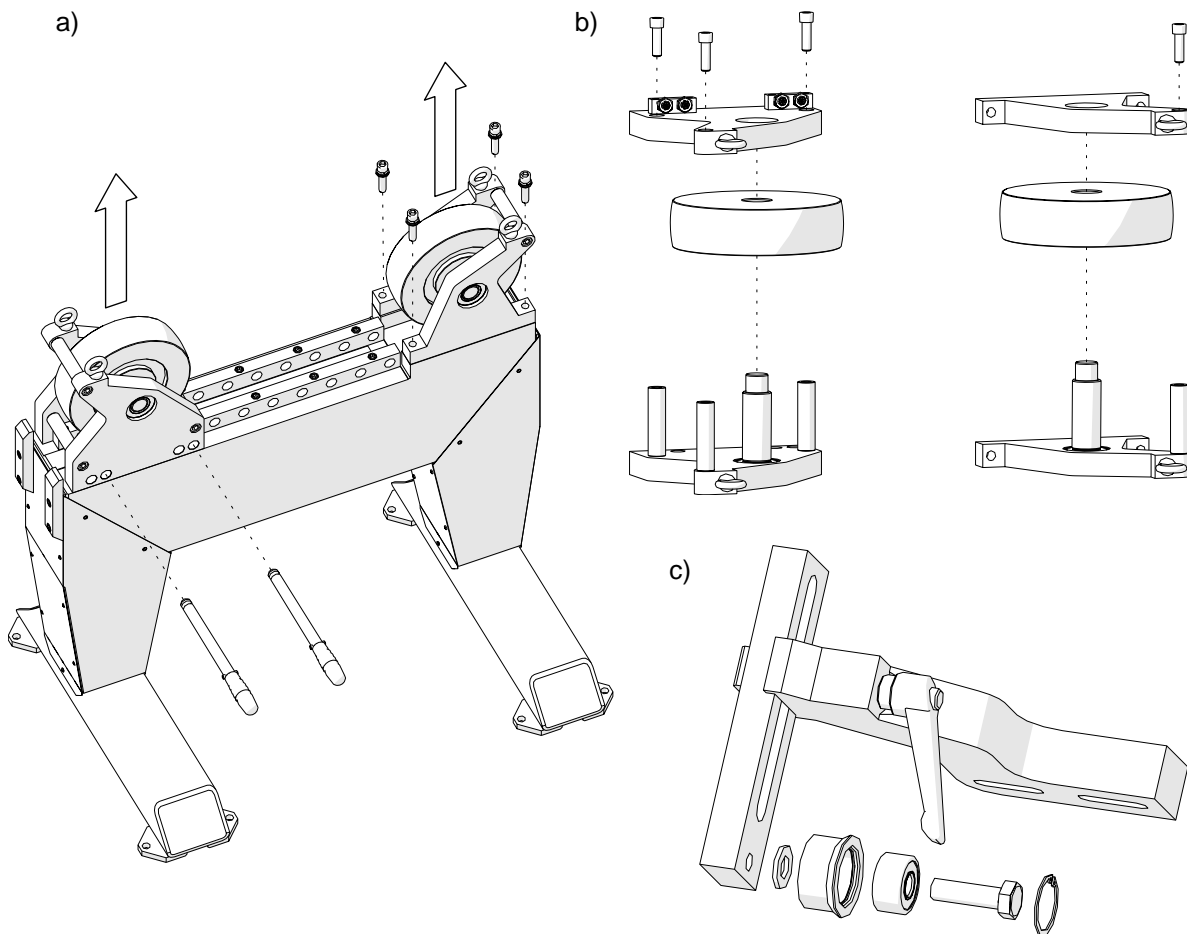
Adapting the machine to work with stainless steel: removing the rollers of the passive support (a, b), removing of the guiding roller (c)
